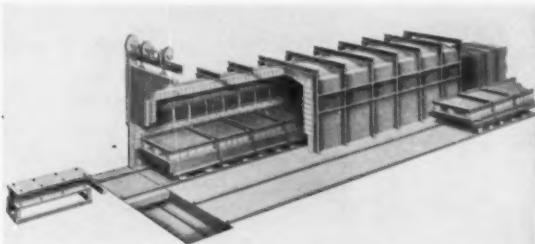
A continuous car-type furnace heated by sidewall-mounted cast elements.
